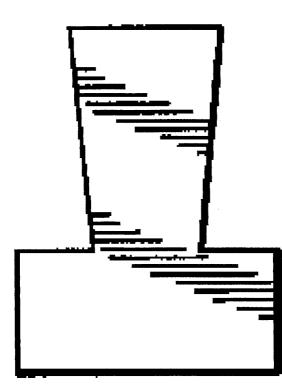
is a top plan view of the fastening tab of FIG. 1; FIG. 7 is a side elevational view of the fastening tab in FIG. 2, the other side is identical;
